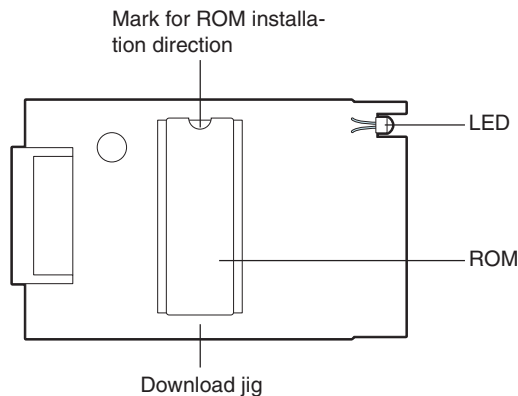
[Jig board: K-PWA-DLM-320]
